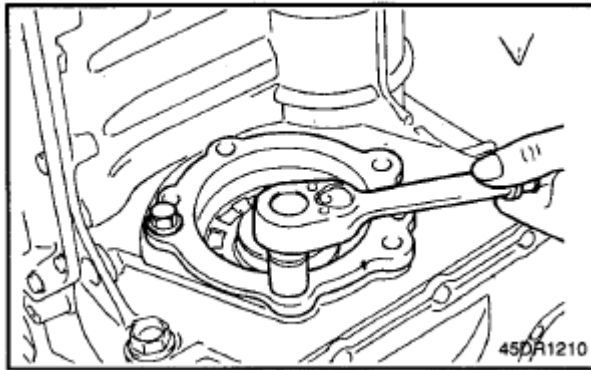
Removing Differential Bearing Retainer Mounting Bolts
